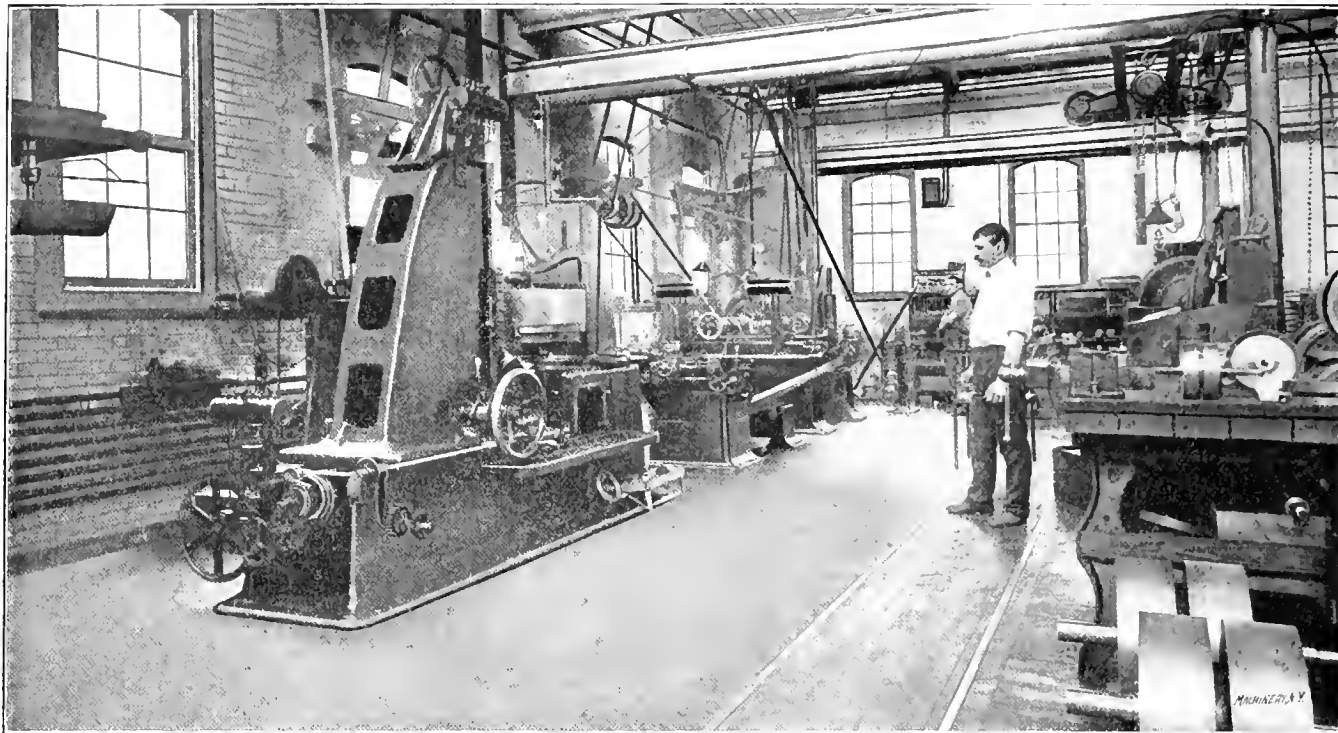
Gear-cutting Department equipped with Special Machines for Hobbing the Teeth of Spiral Gears.
